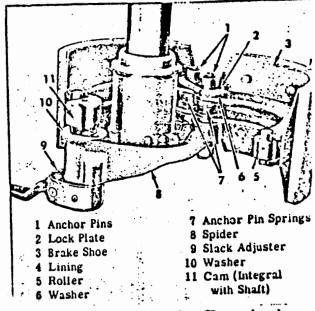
Rear Brake Shoe Anchor Pins Installed (Typical)
